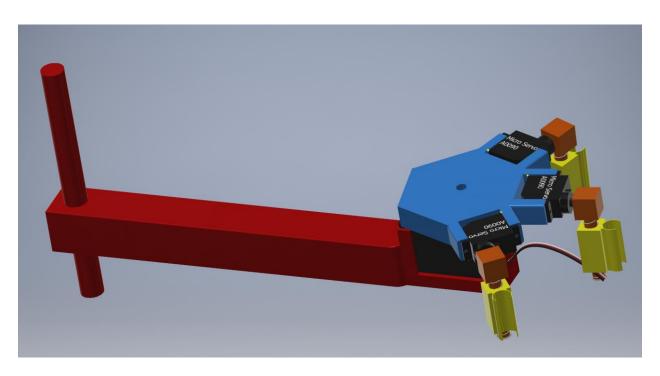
SCARA Robot Arm Segment 2 and Pen Actuator/Pen Holder 3D Model
